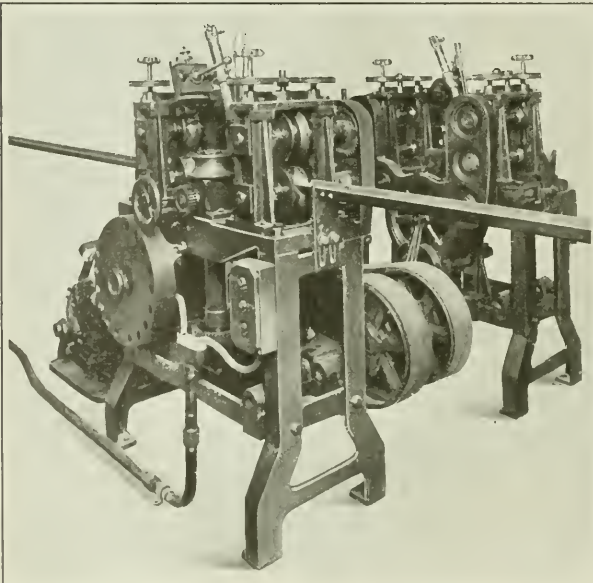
Tube-welding Machines built for Right- or Left-hand Operation
